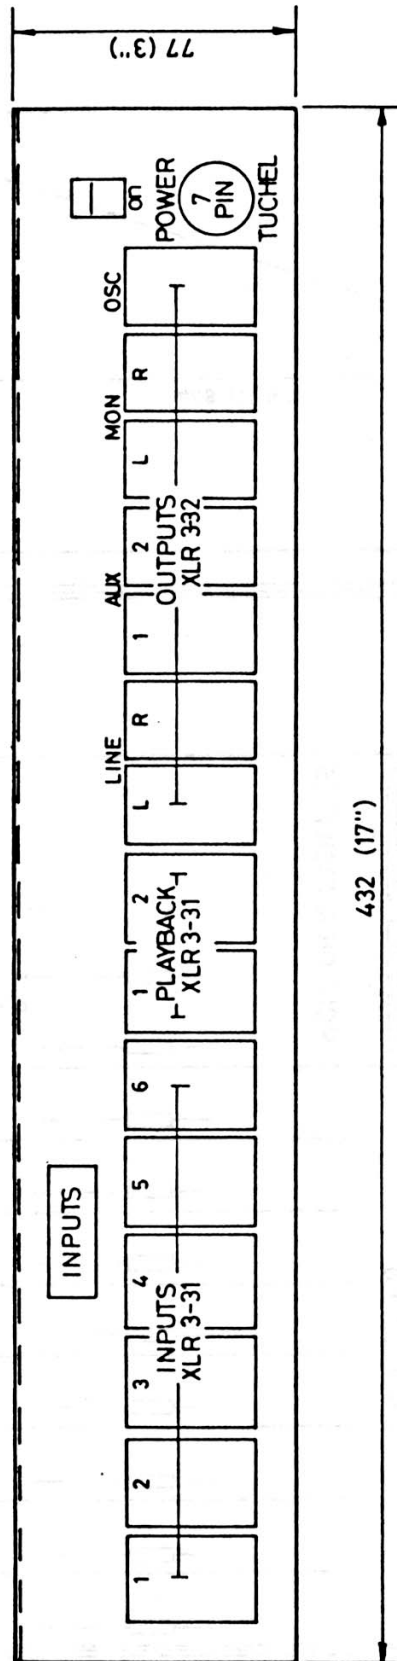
5422-R CONNECTOR PANEL ASSEMBLY
